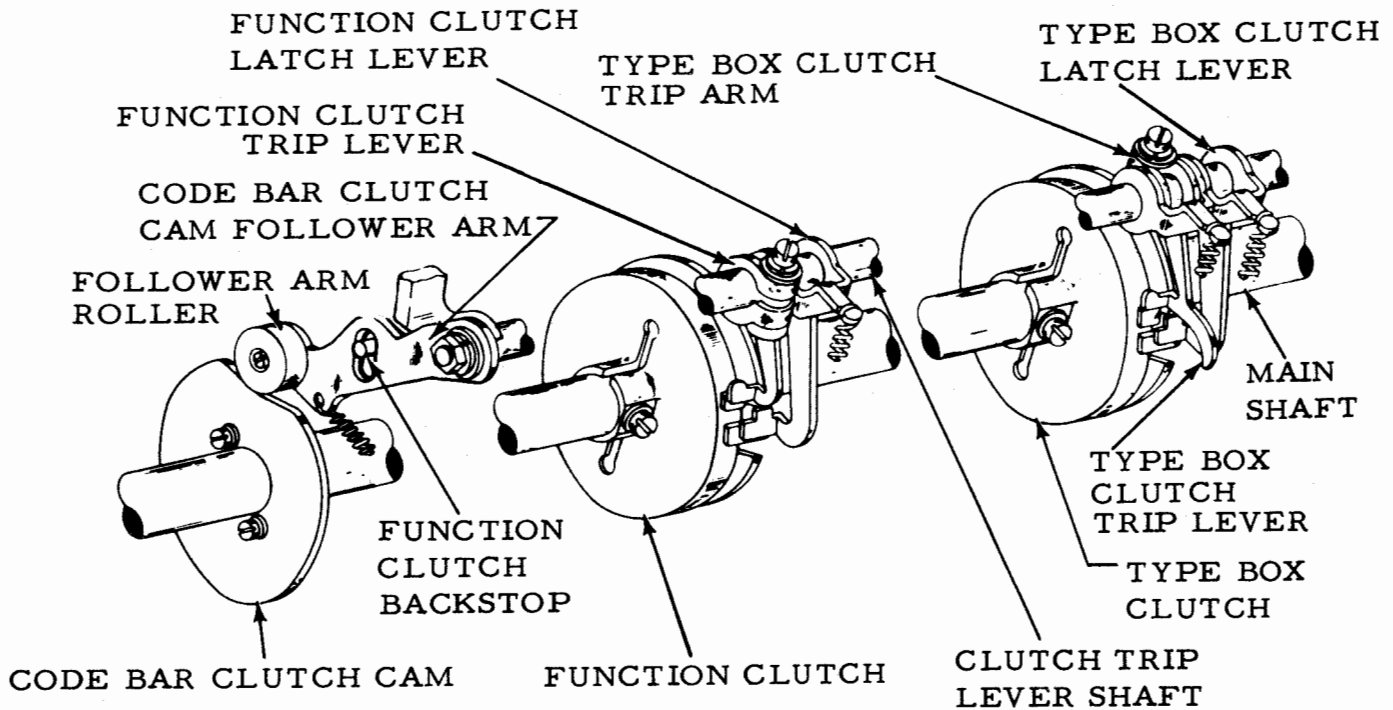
Clutch Trip Mechanism (Right Rear View)
